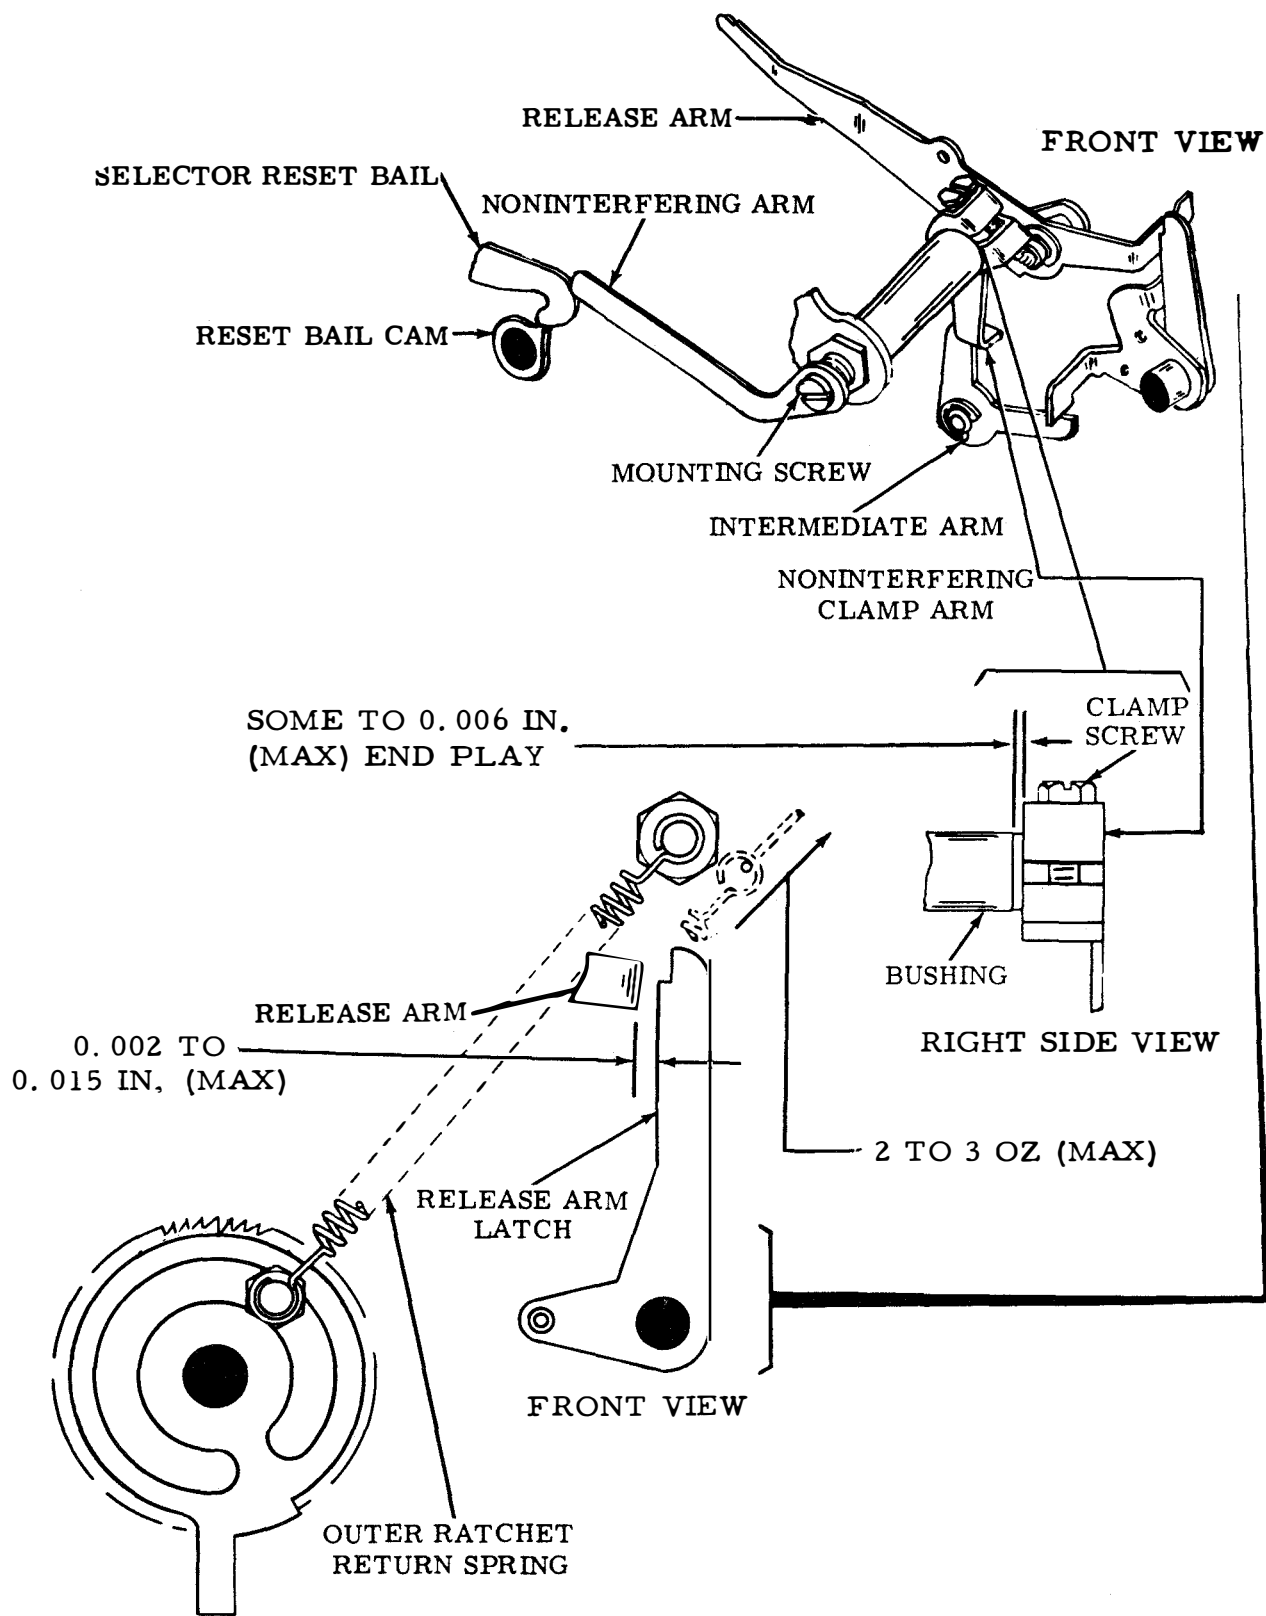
Noninterfering Clamp Arm and Outer Ratchet Return Spring
